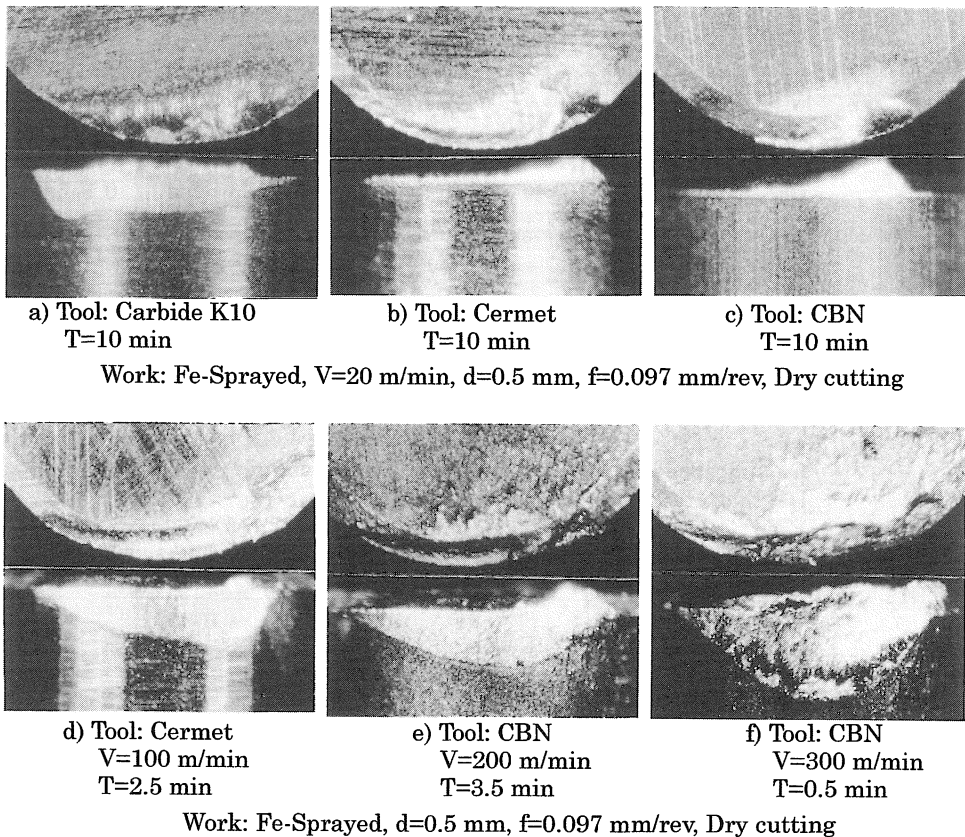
Wear patterns of various cutting tools in machining of ferrous sprayed material
